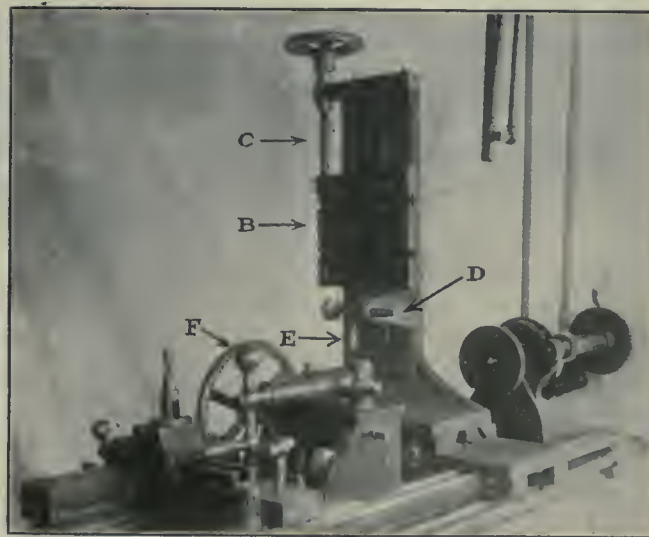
GEAR CUTTING ATTACHMENT FOR LATHE.
